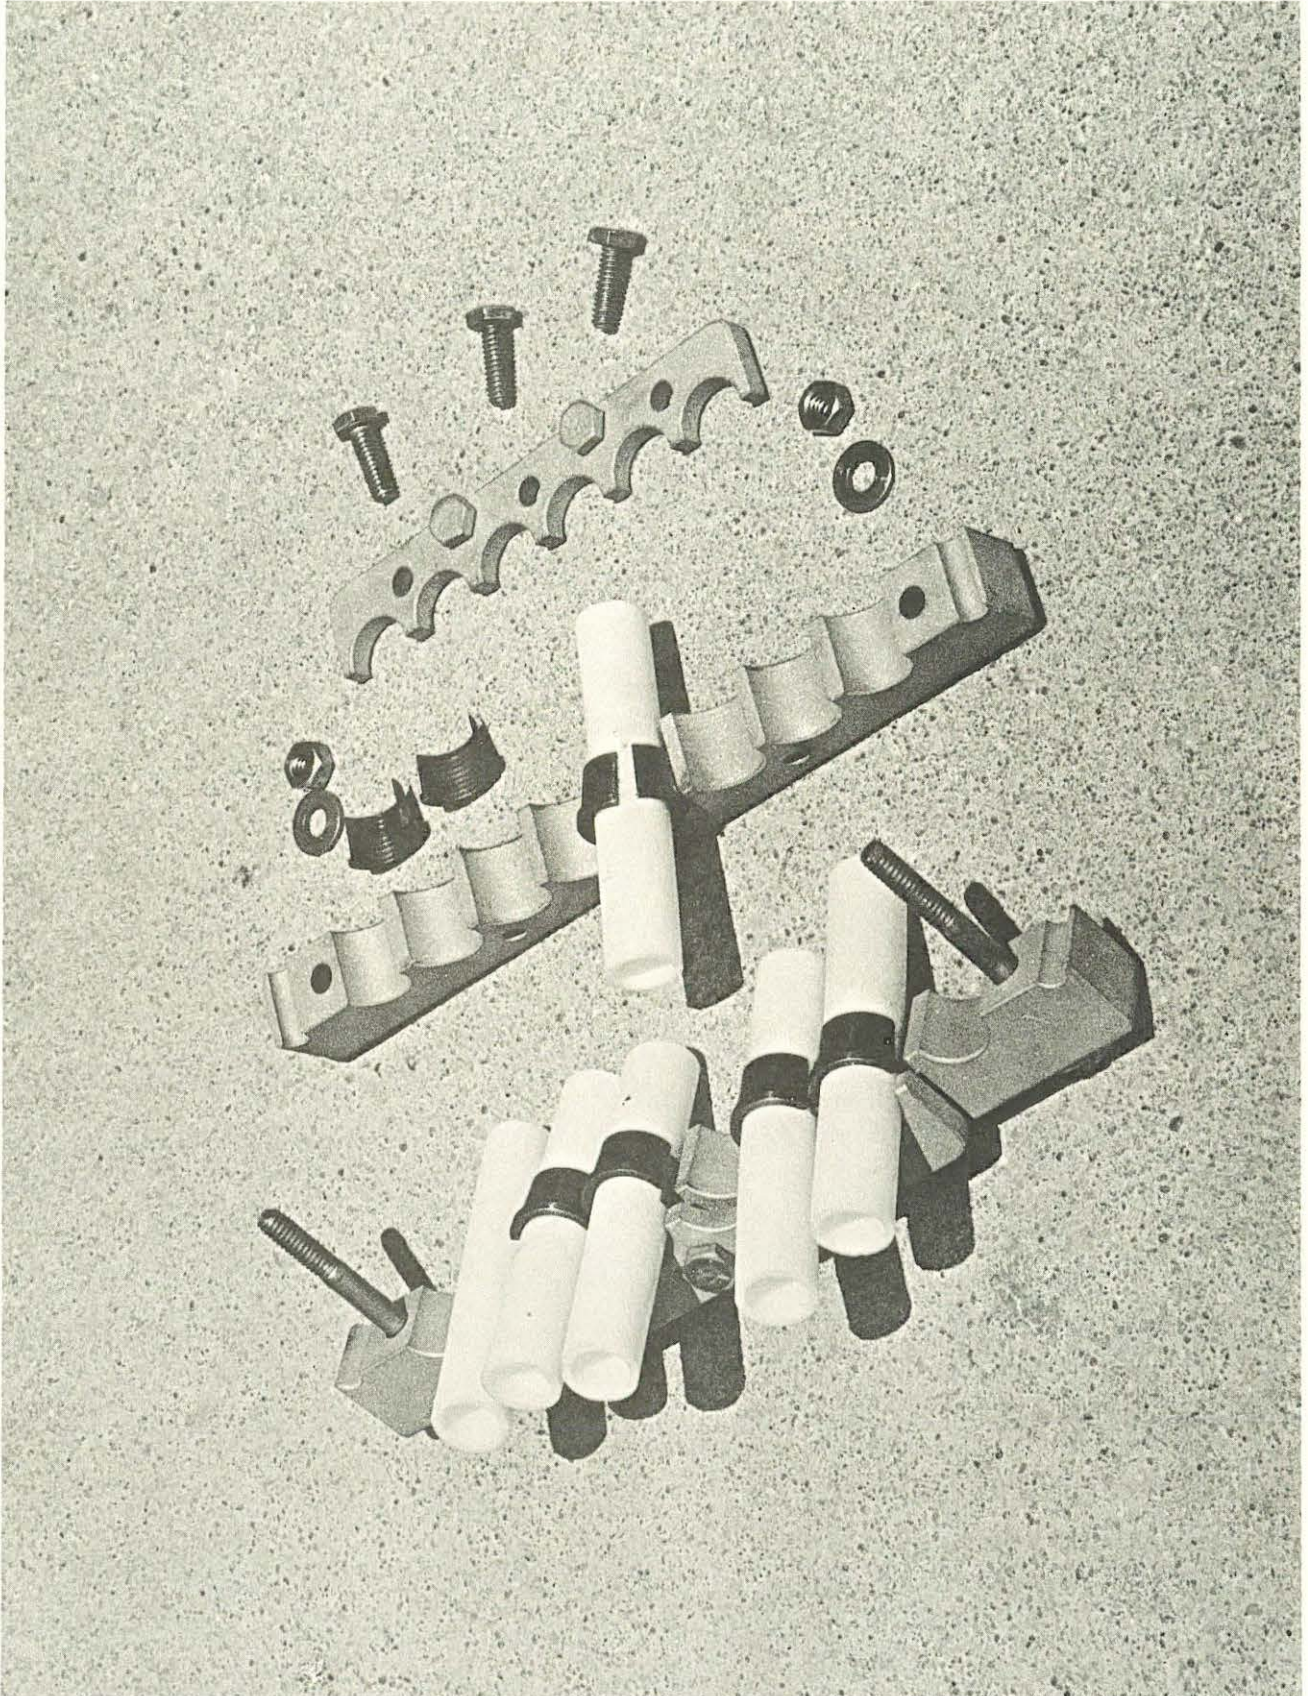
Exploded View of Teflon Tube Lock Bar Assembly
